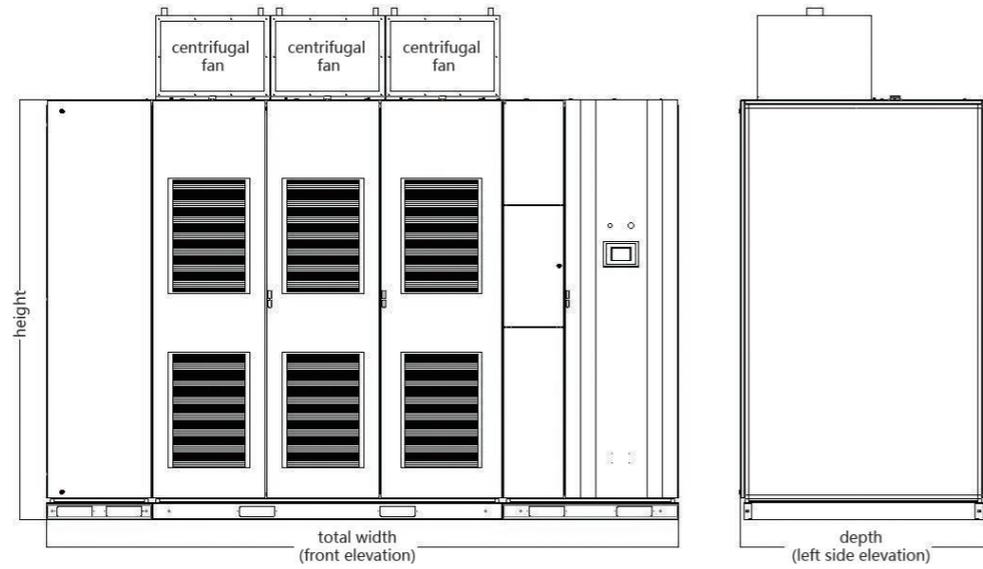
Dimensional Drawing of G31-6kV-Indoor-Air Cooling FGSVG-C6.0/6
